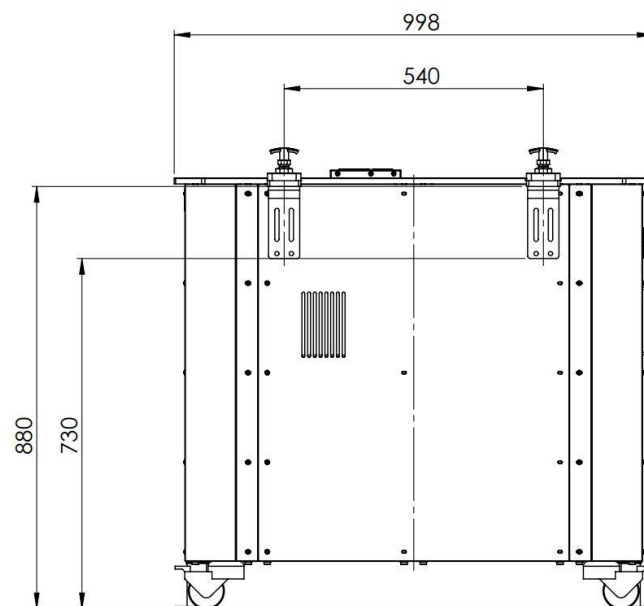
Dimensions mounting device for flange plates and machine flanges MRB S
